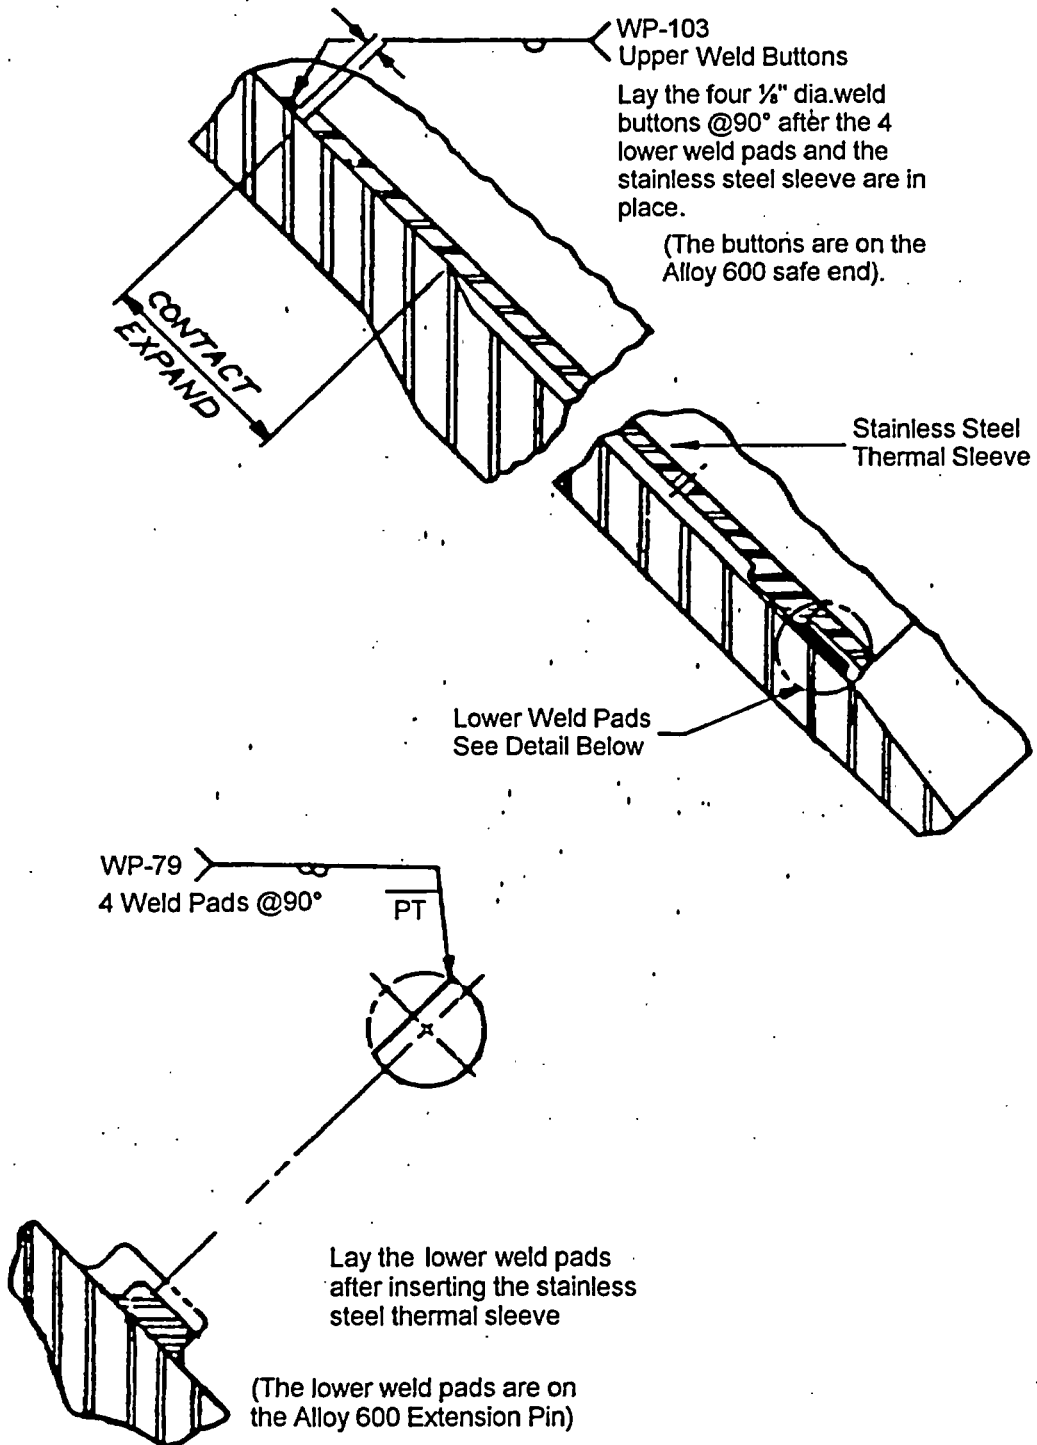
Detail of the weld buttons for positioning the stainless steel thermal sleeve inside the 4-inch spray nozzle.
